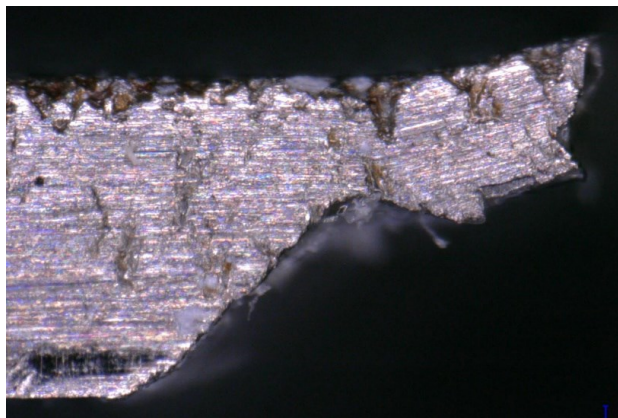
Gouging defects on the surface of a representative half width through-thickness shear specimen caused by water jet machining.
